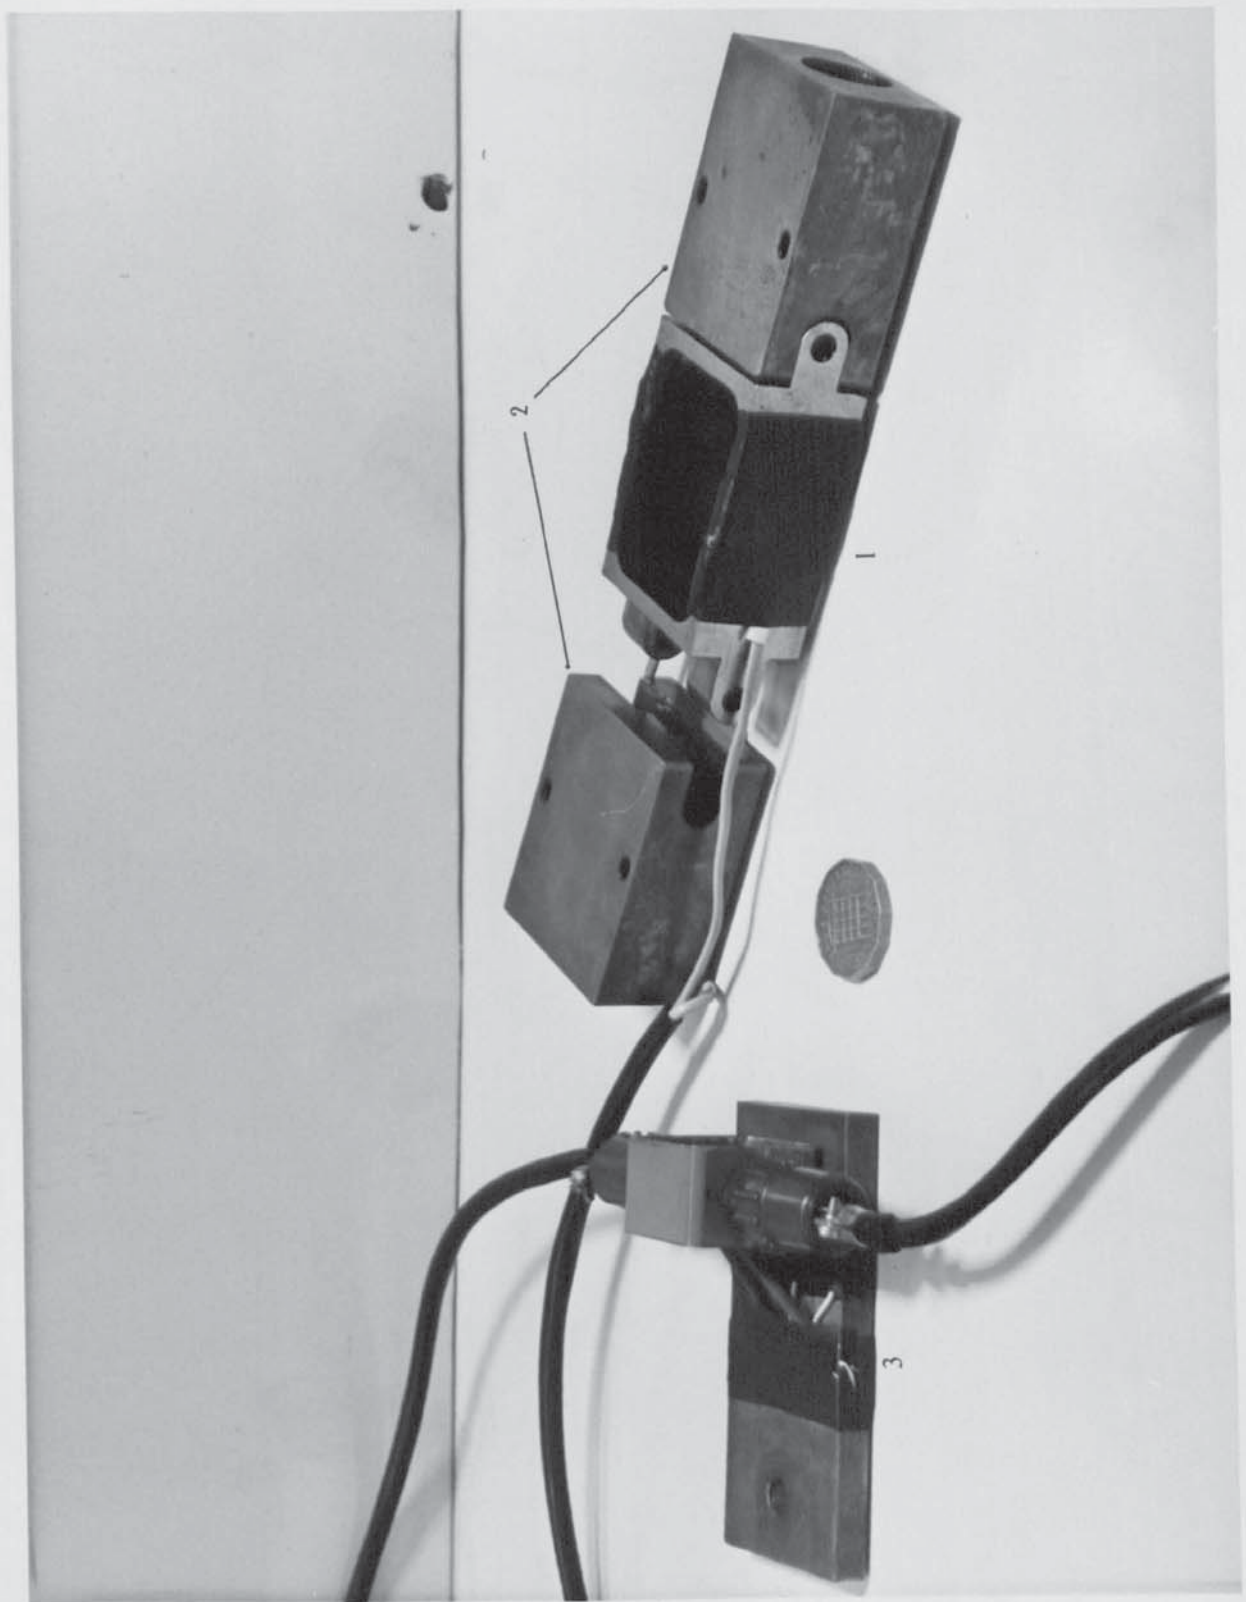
Friction load cell (1) with blank holder plates (2) and 'dummy' gauges.(3)
